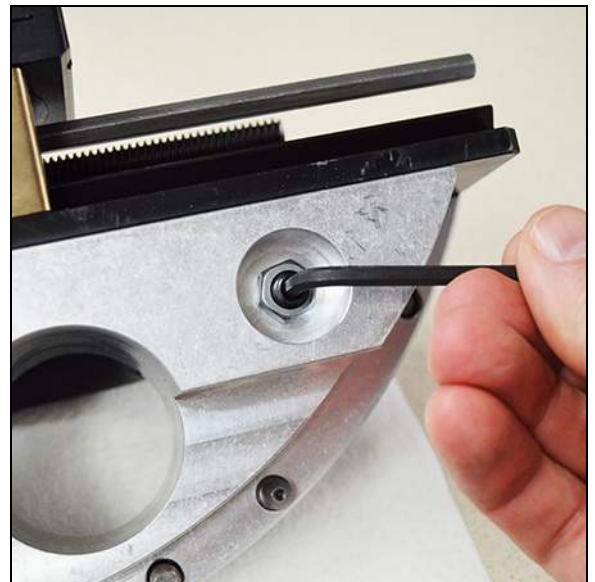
LOOSEN THE SLIDE PIN BACKING SETSCREW (FF1200 SHOWN)
